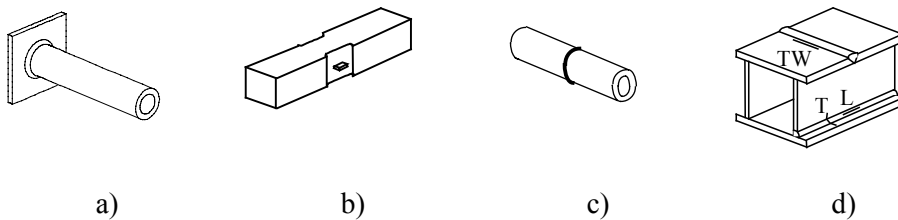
Specimen geometry of a) circular tube-to-plate, b) box beams with longitudinal attachments, c) circular tube-to-tube, d) welded box beam (TW= crack in transverse weld, T = transverse crack, L = longitudinal crack).
